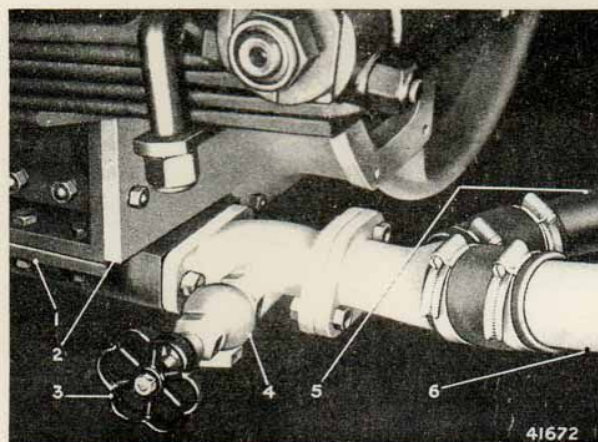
WHEEL VALVE FOR DRAINING THE COOLING SYSTEM.
